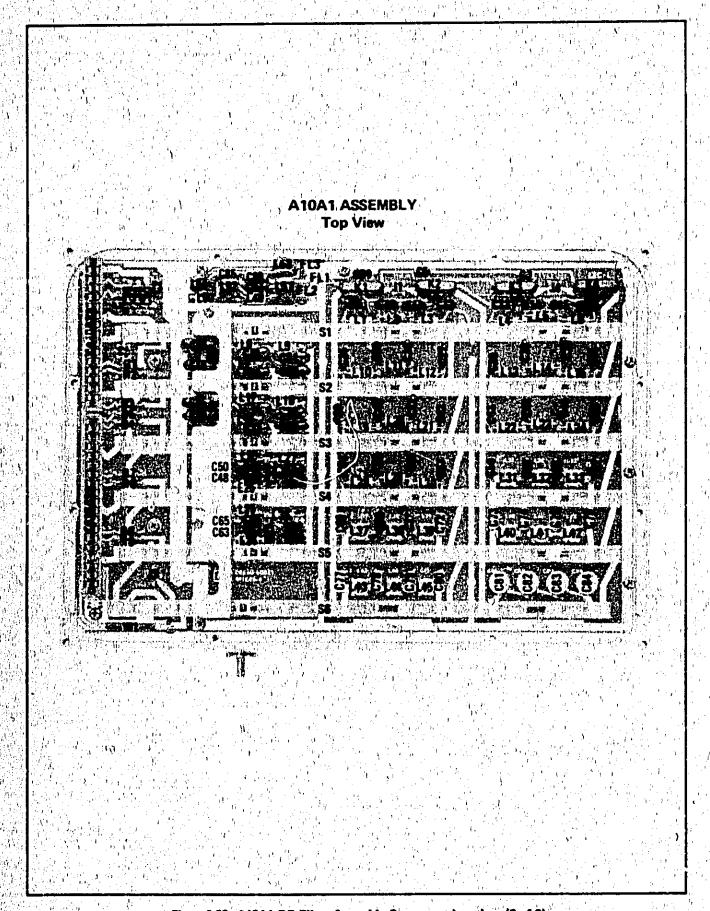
A10A1 RF Filter Assembly Component Locations (2 of 2)
